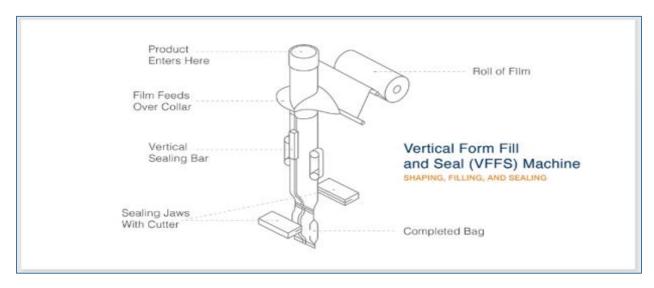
Vertical Form Fill and Seal (VFFS) Machine Specimen
